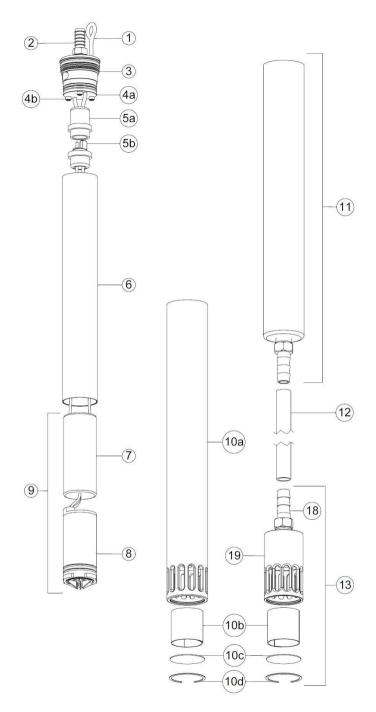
Geosub 2 Pump and Drop Tube Assembly
